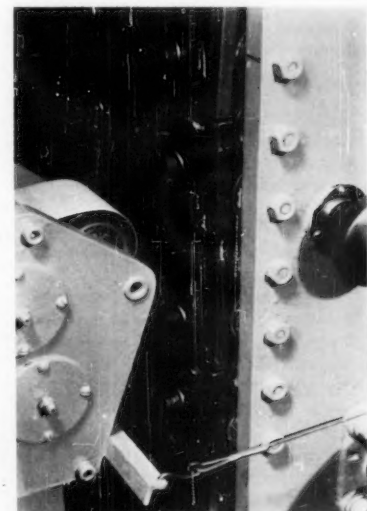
Detail of Armstrong specimen plates, back-up rollers, and specimen fasteners
